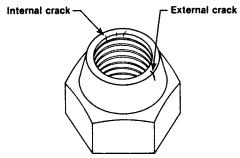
Typical Locking Element Cracks in Prevailing-Torque Nuts
